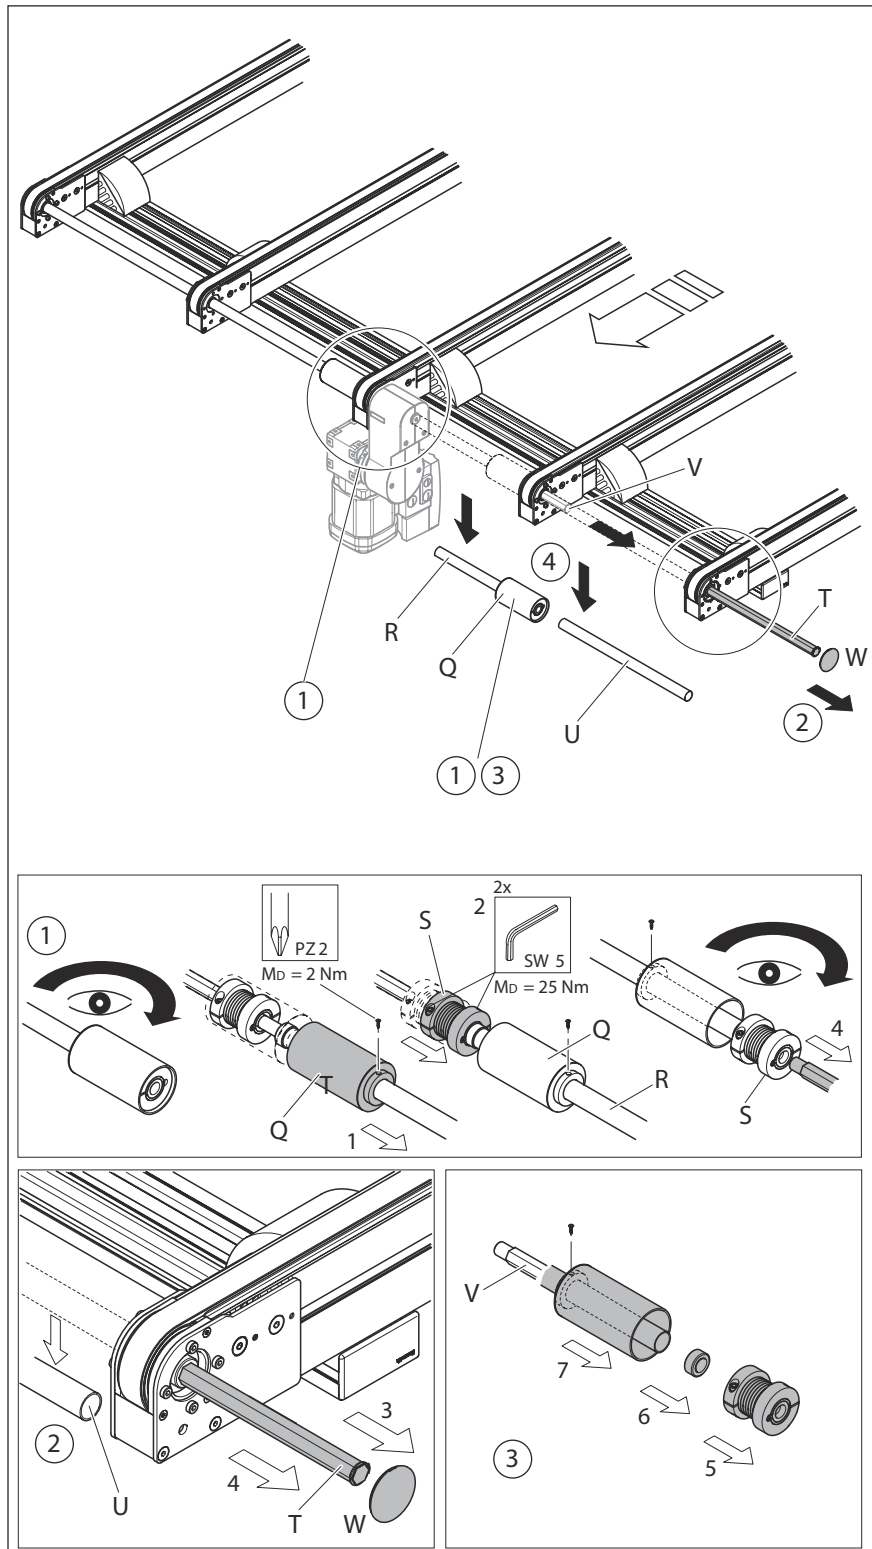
Assembly at belt section CSS/N, CSS/NT: MS = 3 (1/3)
